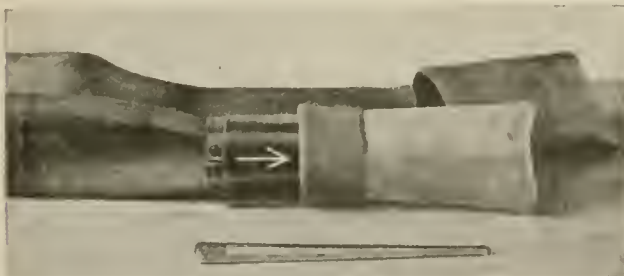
FIRST END DRAWN OVER THE EXPANDER
